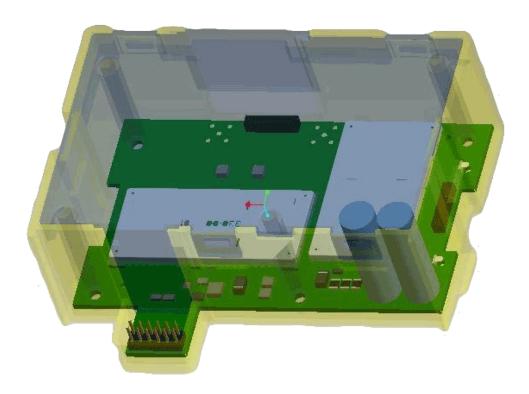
Detail of the eMCM Circuit Board Mounting in Plastic Case
